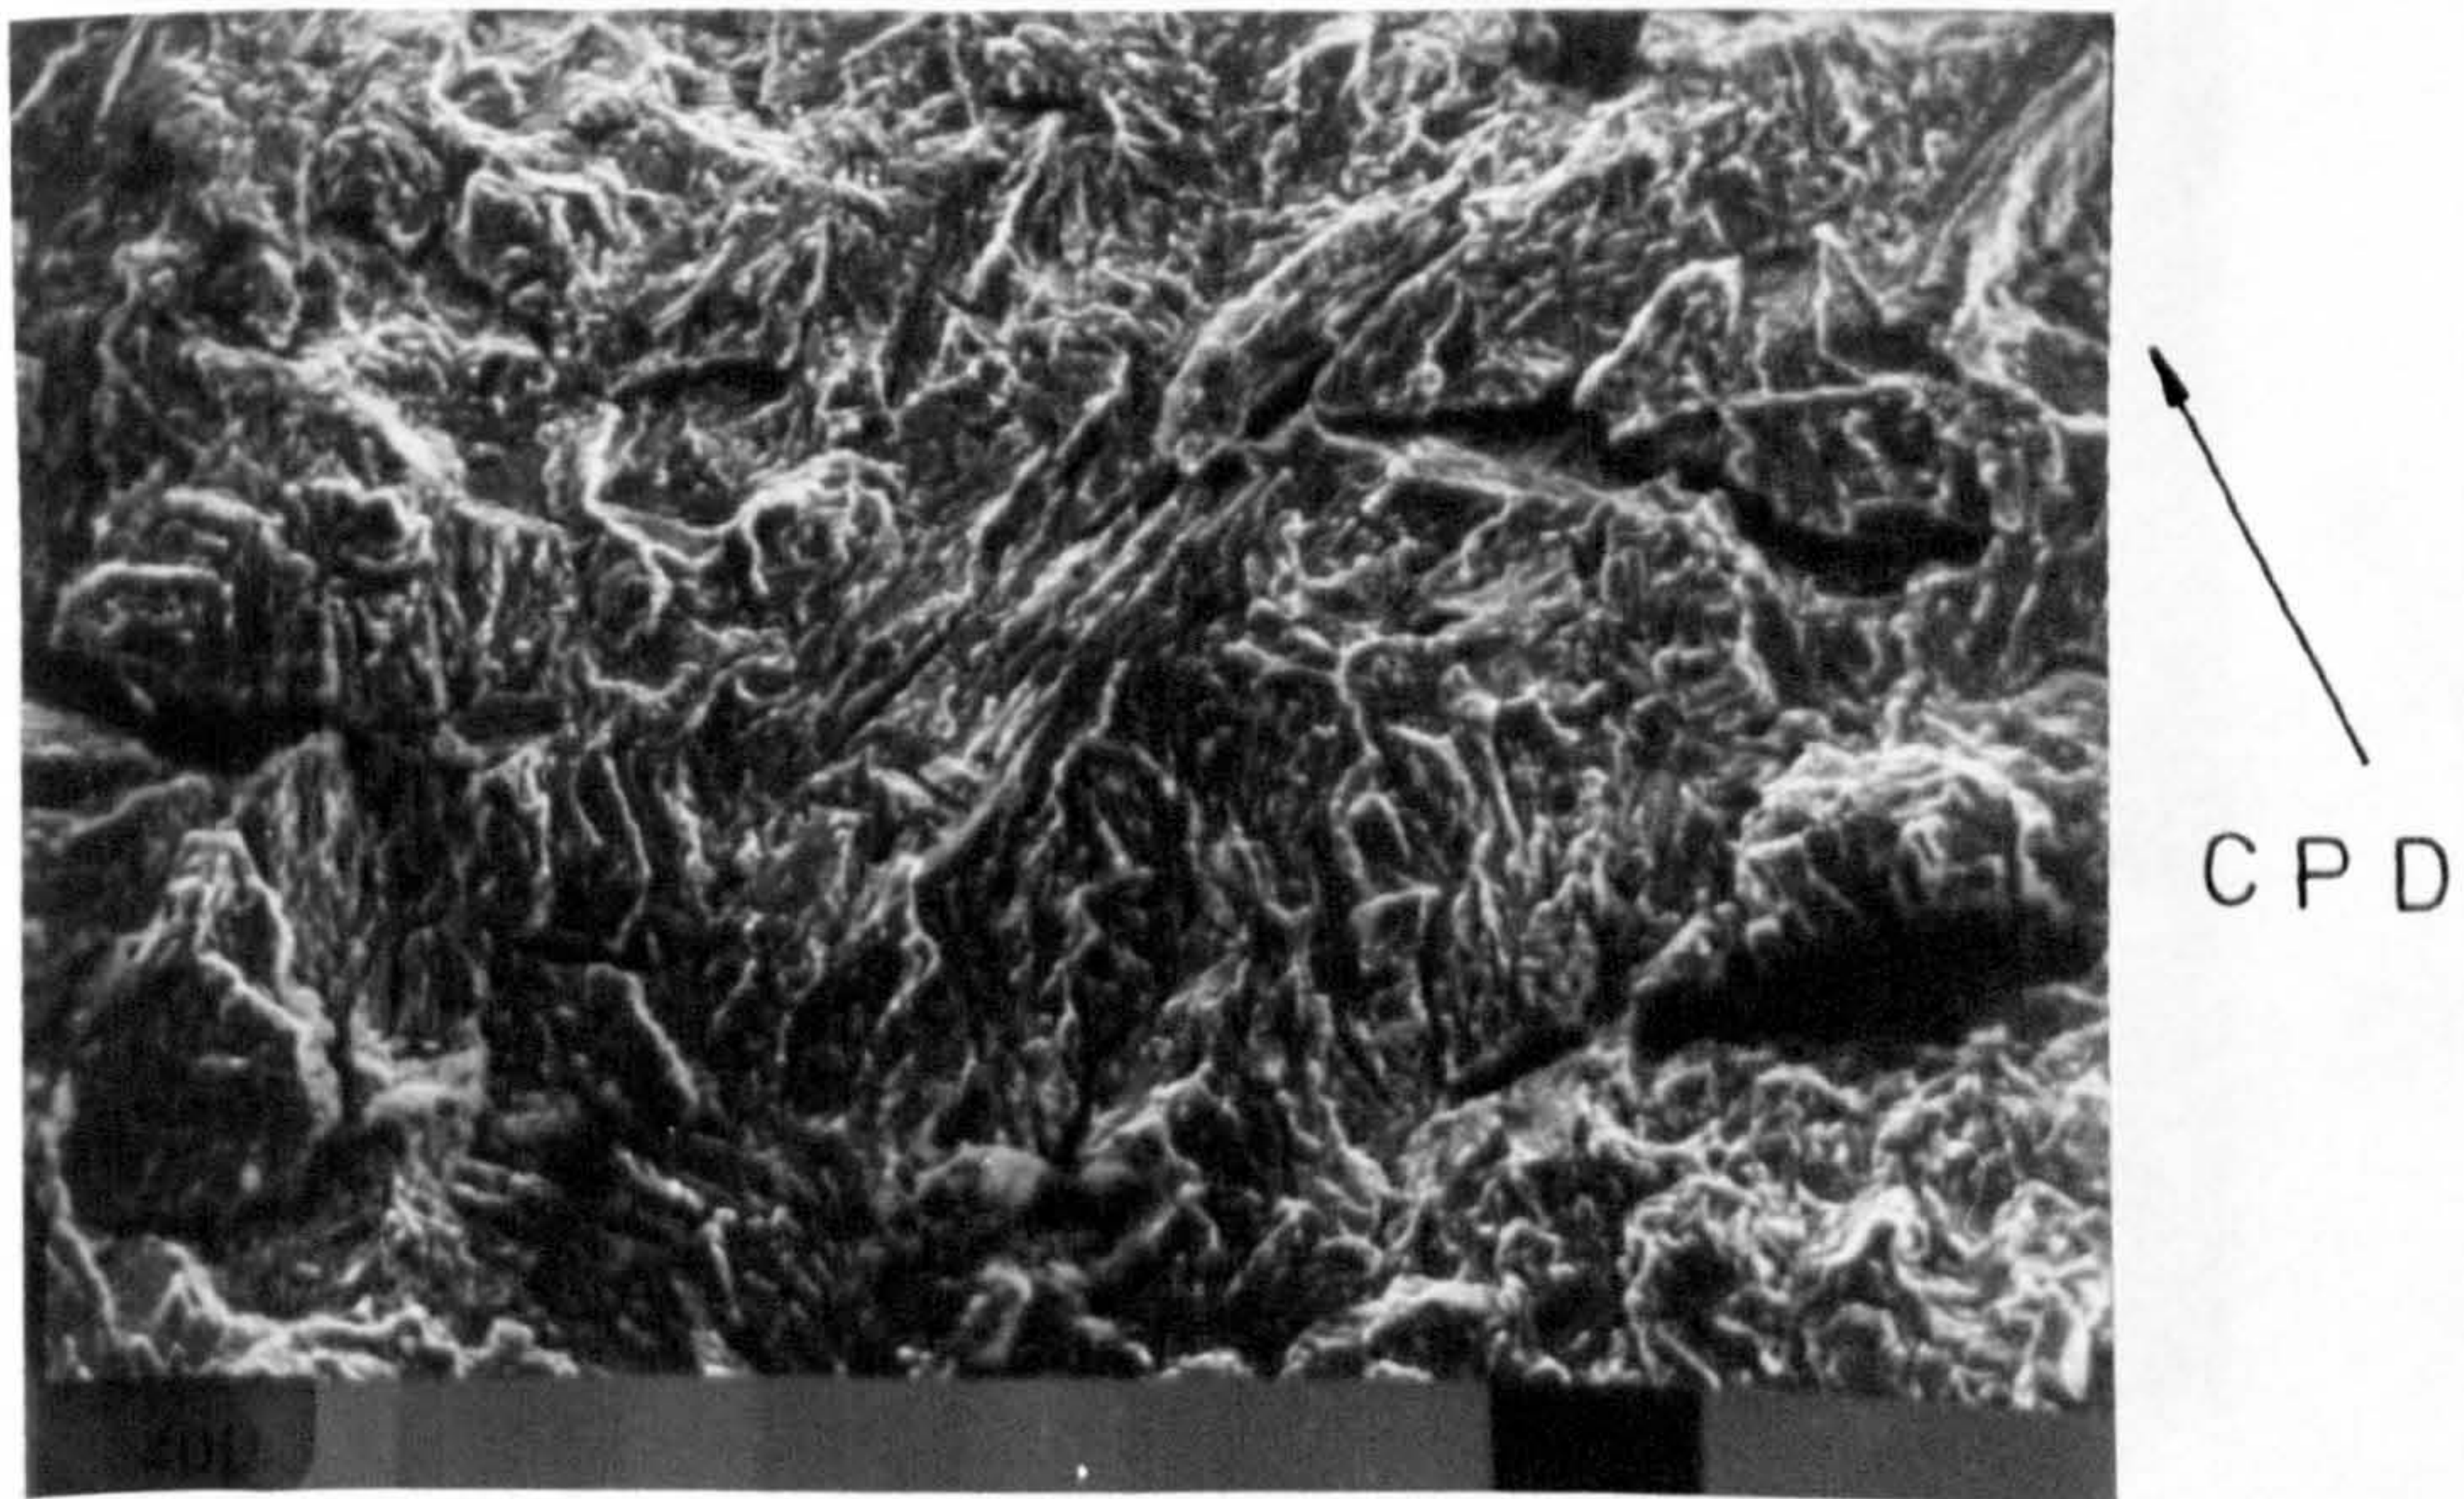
Fracture surface of heat affected zone, -1400 mV (S.C.E.), crack sides covered ($\Delta K = 37$ MPa \sqrt{m})
